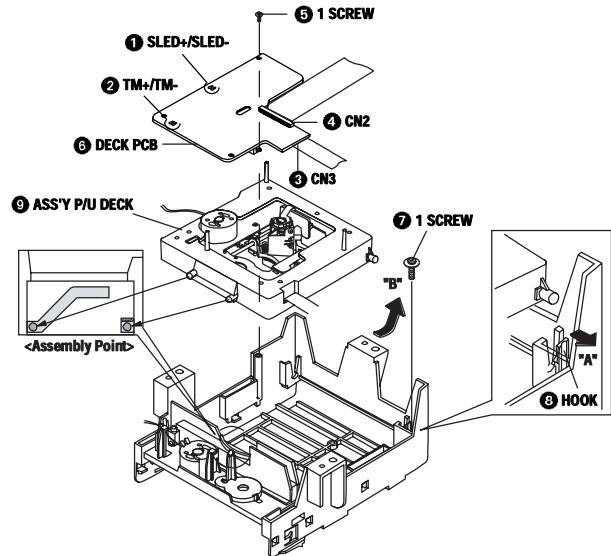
Removing PCB Deck Assembly, P/U Deck
